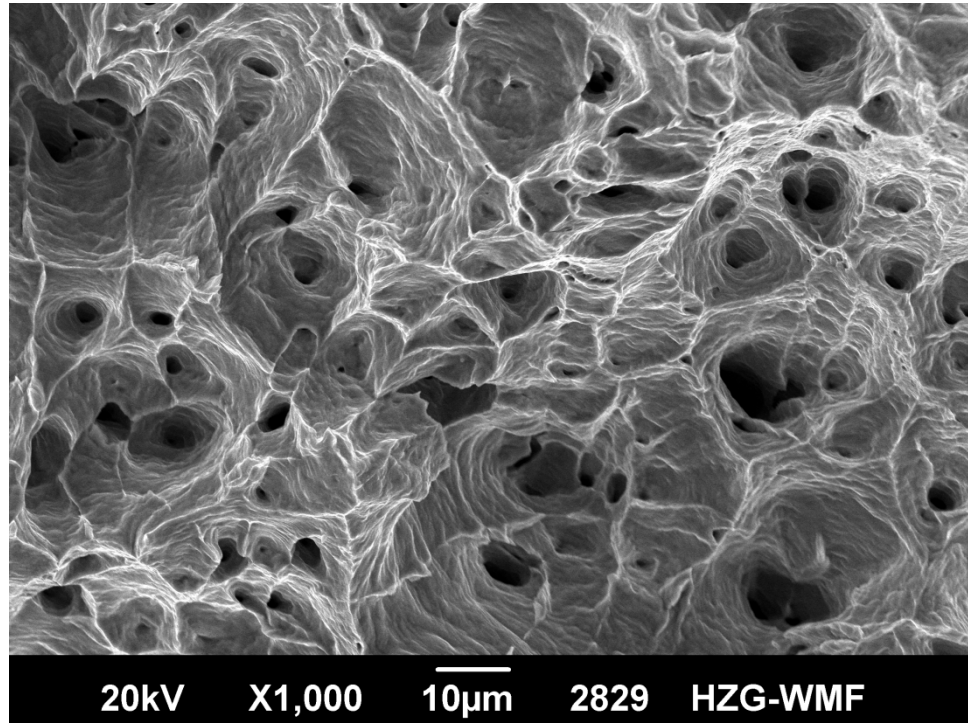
Ductile fracture surface consisting of many ductile dimples and microvoids
